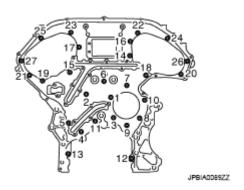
Rear Timing Chain Case Mounting Bolts Tightening Sequence Courtesy of NISSAN MOTOR CO., U.S.A.
